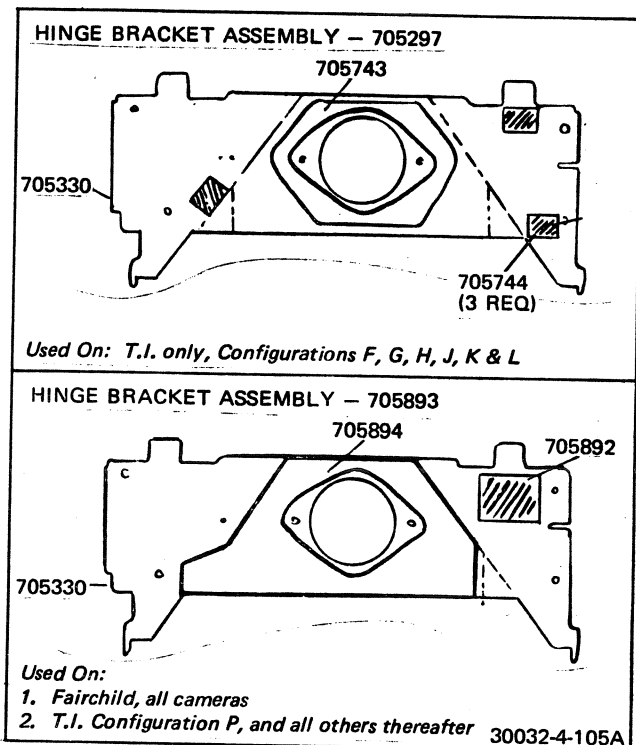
A HINGE BRACKET ASSEMBLIES
